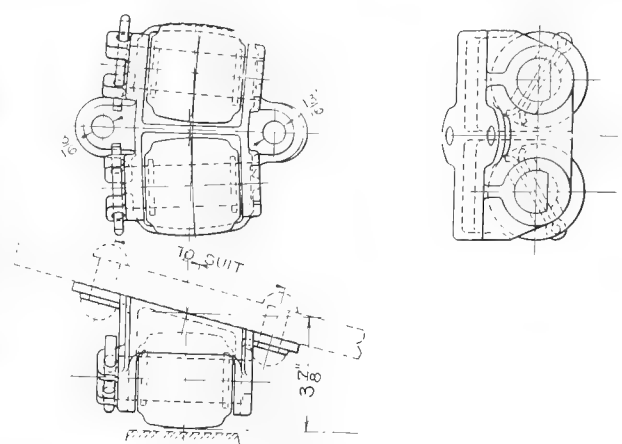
Economy Inverted Style Roller Side Bearing for Freight Service.
